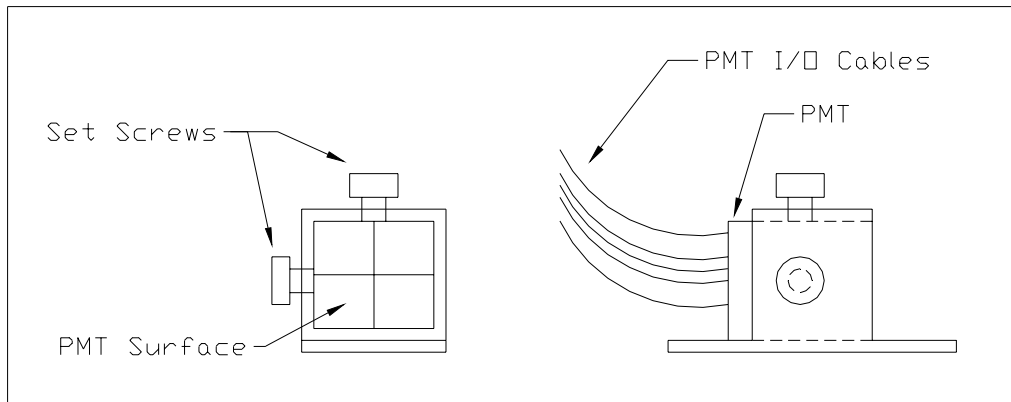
PMT Mount. PMT is held in place using the two set screws.
